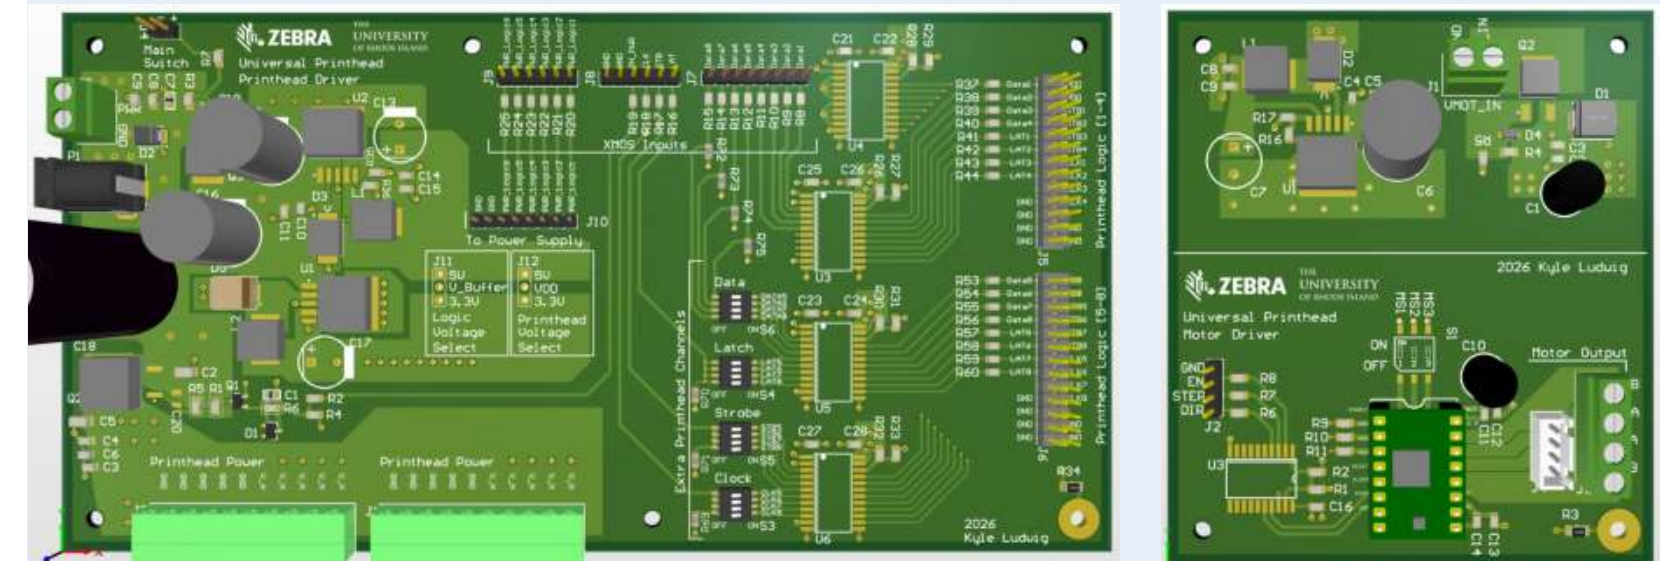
Custom PCB solutions for powering and connecting the XMOS development board
